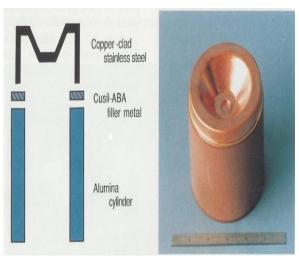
A schematic cross section of the assembly (left) and the actual brazed sample (right)
